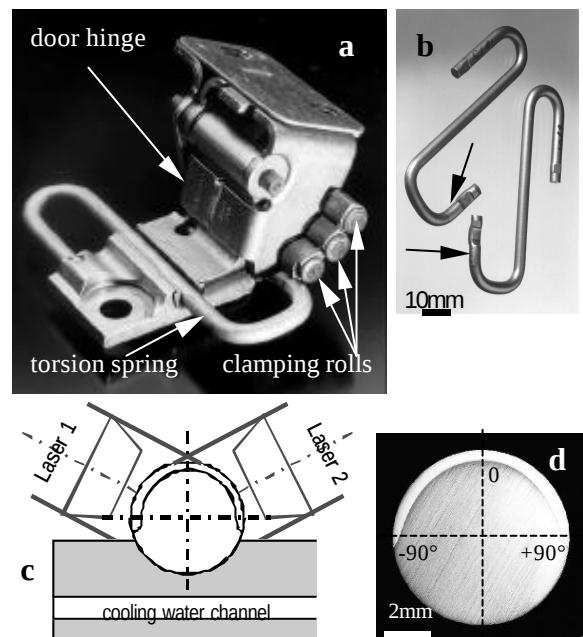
Hardening of torsion springs: a: door hinge, b: torsion springs, c: hardening setup with two lasers and watercooled fixture; d: cross section
